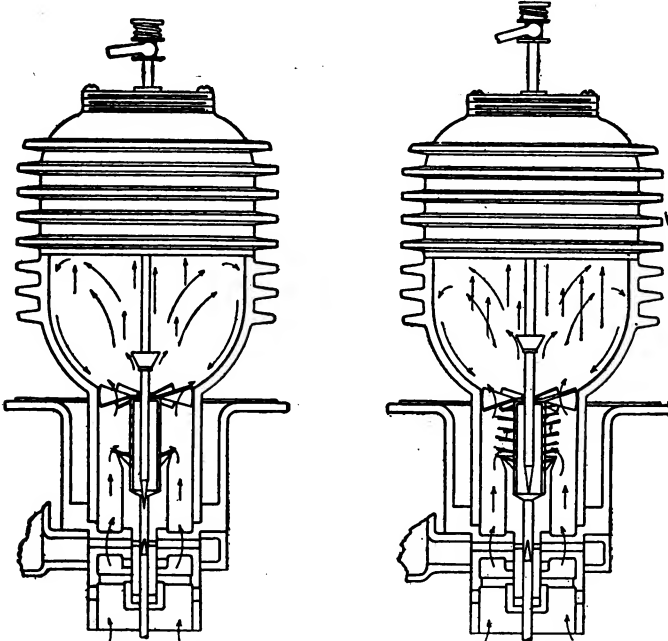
Detail of Radiator, Wilcox-Bennett Carburetor
